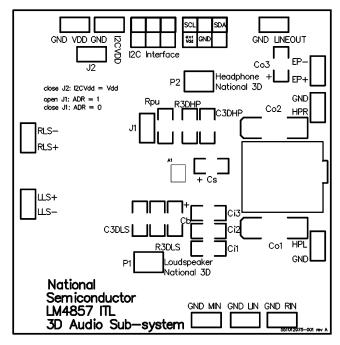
Recommended DSBGA PCB Layout: Top Silkscreen
